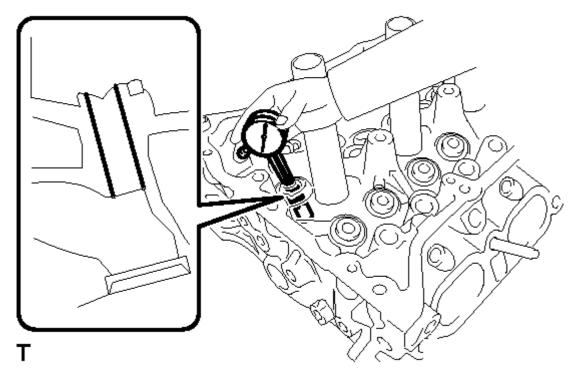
Measuring Bush Bore Diameter Of Cylinder Head
